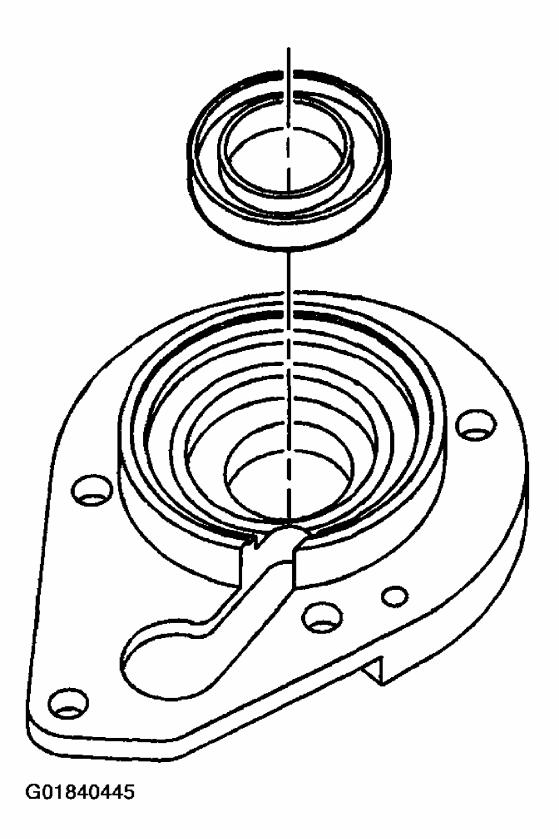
Removing Input Shaft Seal From Input Shaft Bearing Retainer
